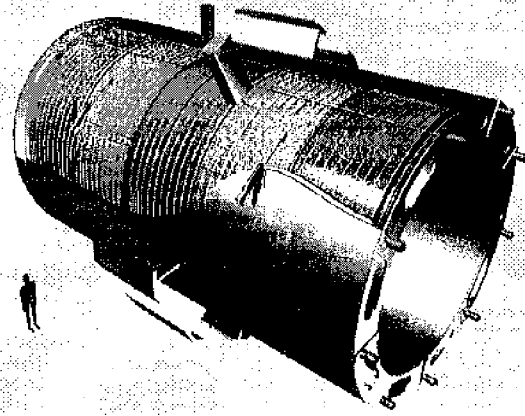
Perspective view of the CMS coil inside the vacuum tank showing the five modules.
